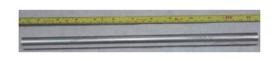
Al sleeve (left) and Mg core rod (right). Billet components prior to composite billet assembily.
